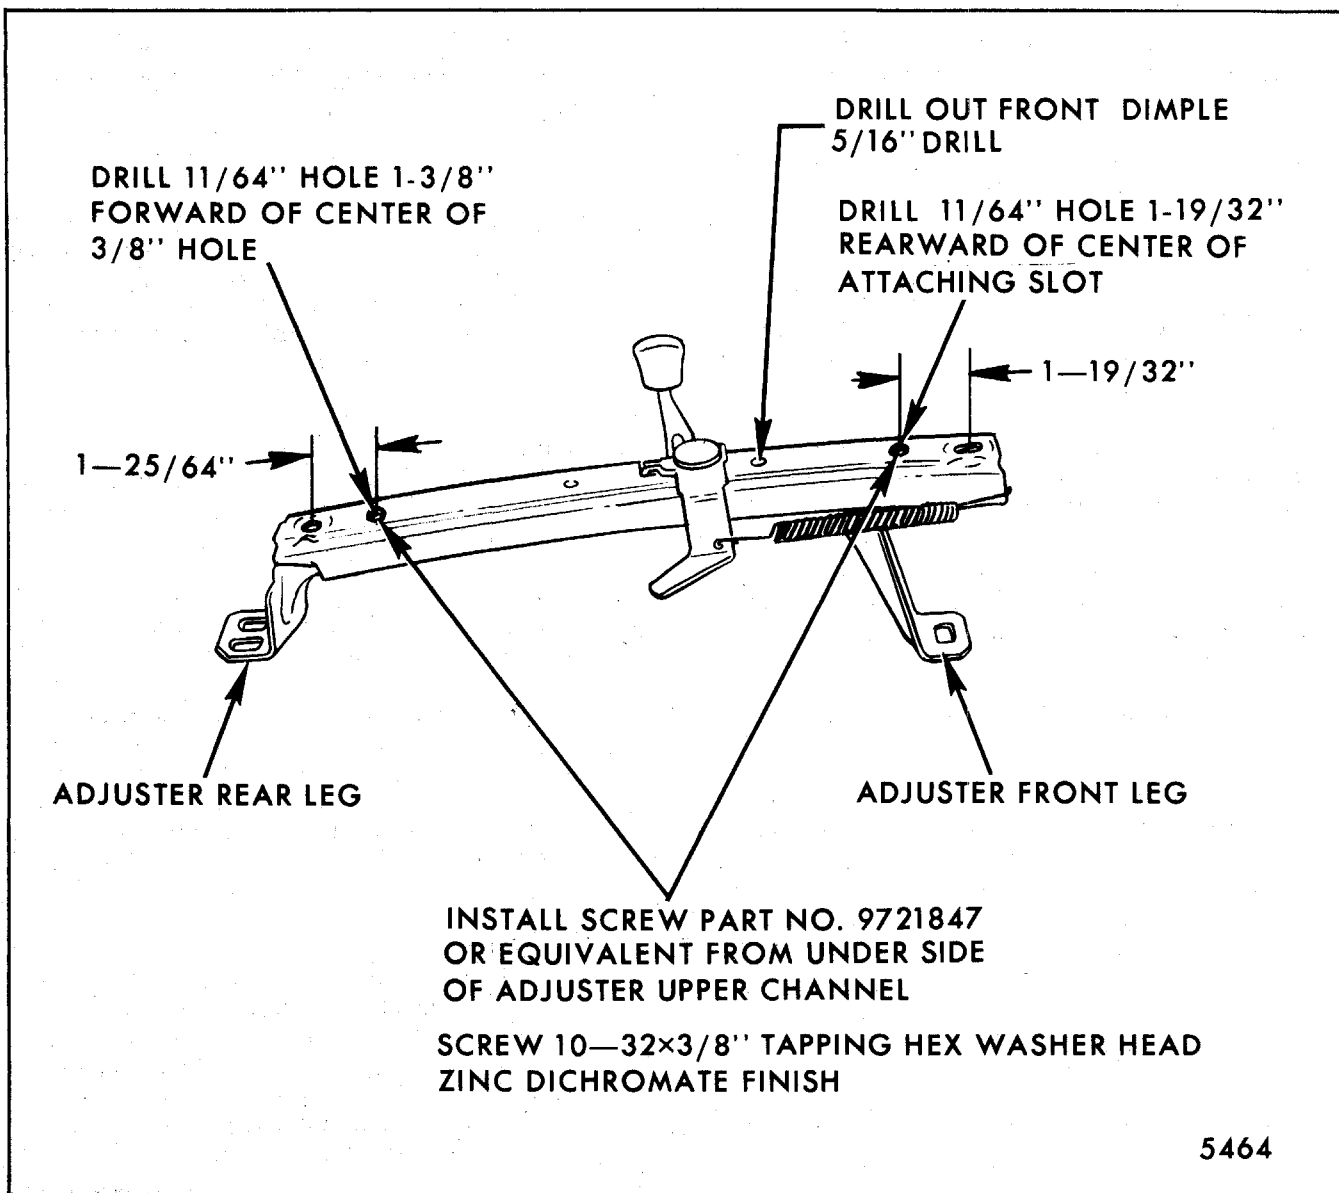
Dealer Relocation Provision for Moving Adjuster Travel 3/4" Forward - "A" Body Styles ONLY Equipped with Full Width Bench Seat Manual Adjusters or 60-40 Seat Manual Adjusters
